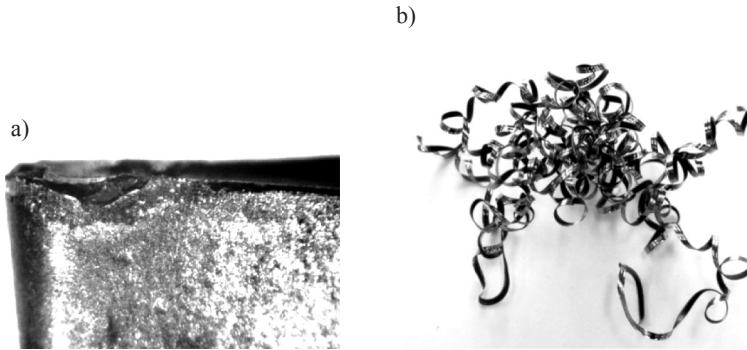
Example of final stage insert wear: a) flank face wear photo, b) long tangled chips;
